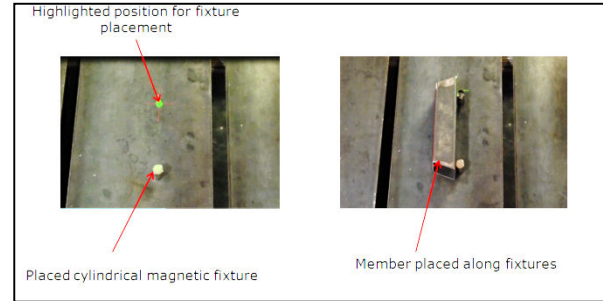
Fixture position highlighted by robot mounted laser projector (left) and workpiece placement (right)
